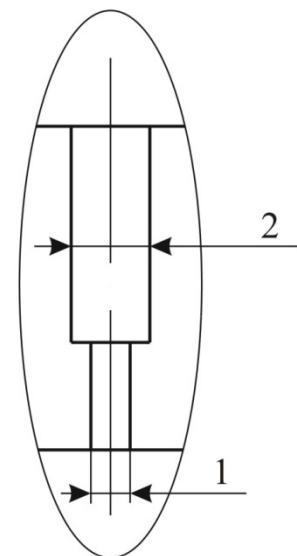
Shape and dimensions of the tool for forward micro-extrusion
